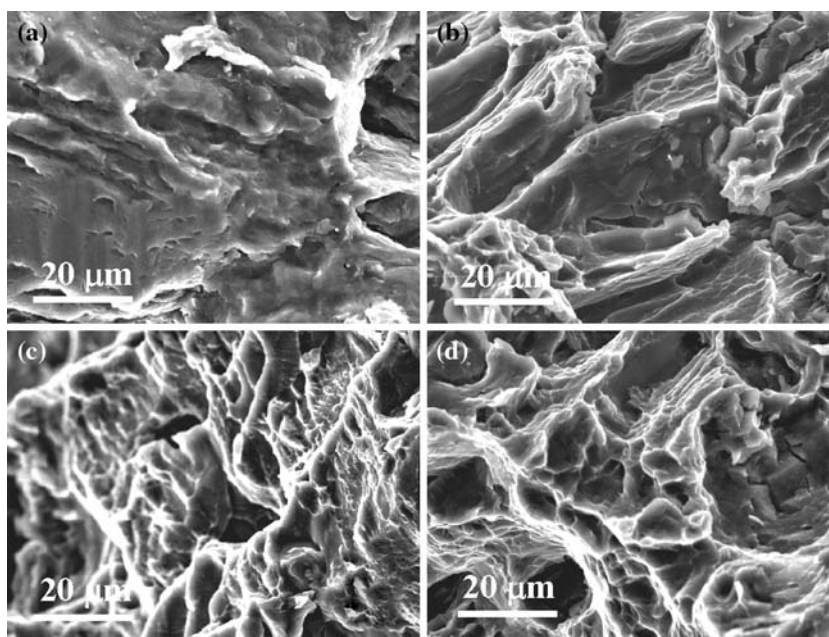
Typical fracture surfaces of the notched specimens: (a) R = 1 mm, (b) R = 2 mm, (c) R = 4 mm and (d) R = 8 mm
